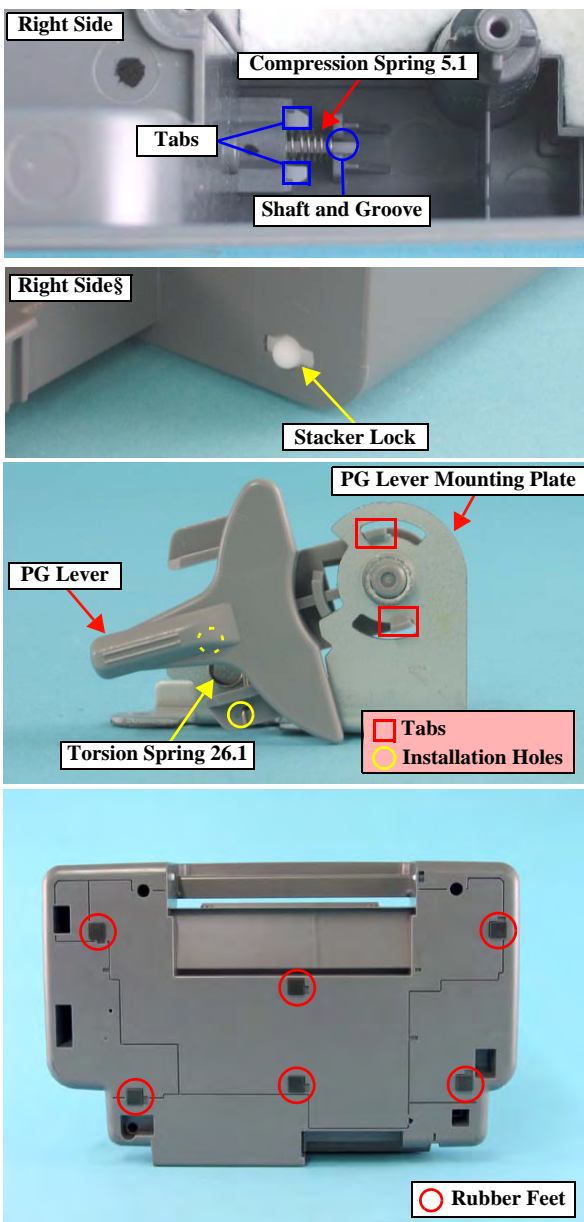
Removing Stacker Lock/PG Lever/Rubber Feet
